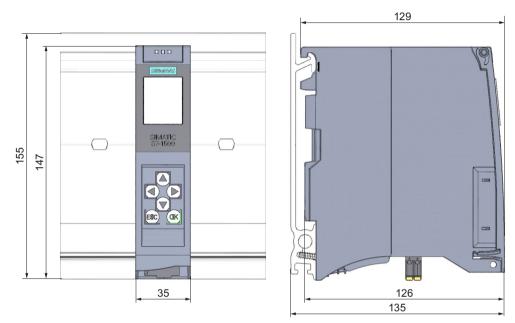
Dimensional drawing of the CPU 1511T-1 PN, front and side view
